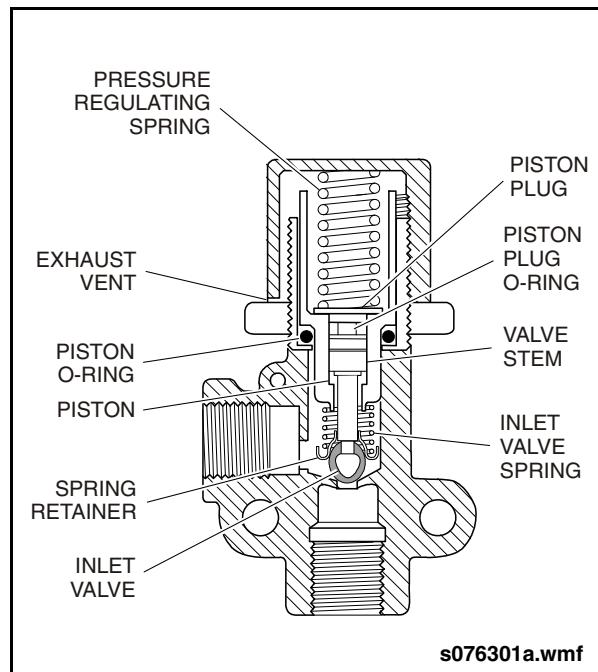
PR-2 Pressure Protection Valve Cross Section
